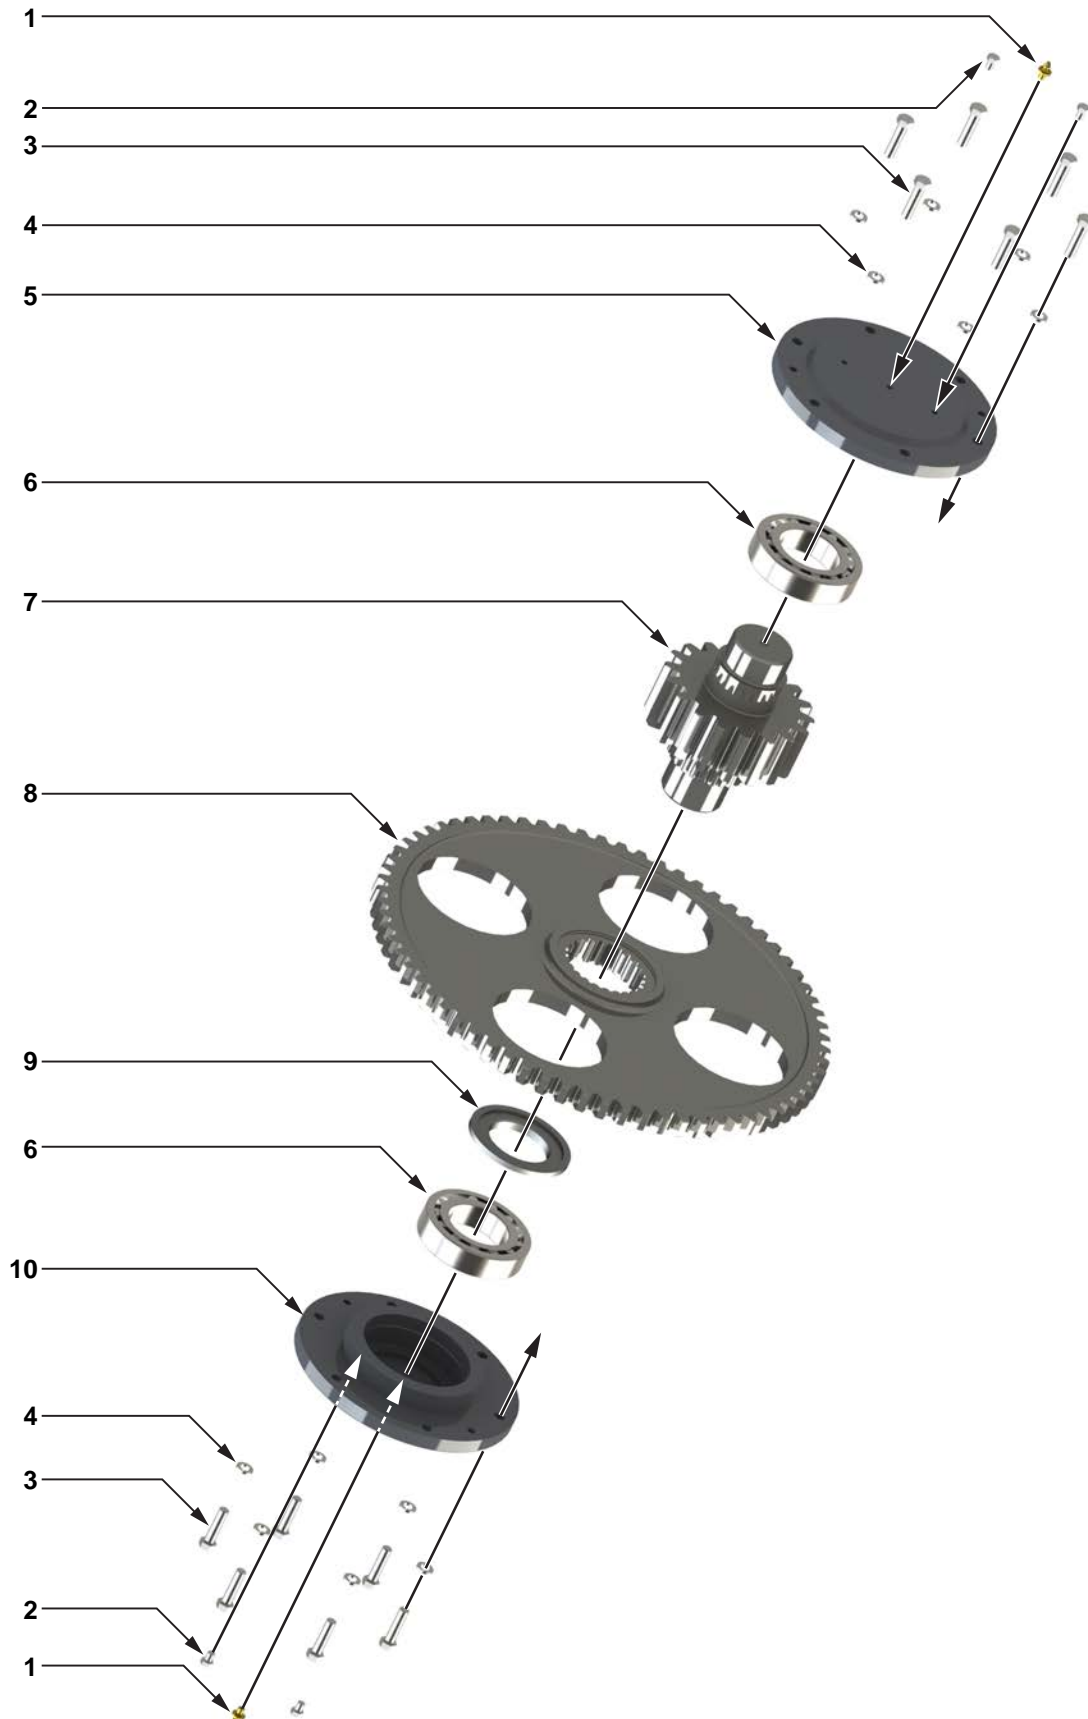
101-3498 HD31-80K Pinion Exploded
